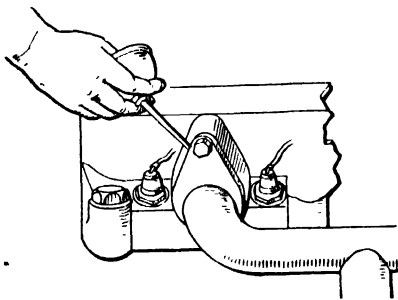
Locating Air Leaks in Intake Manifold.
